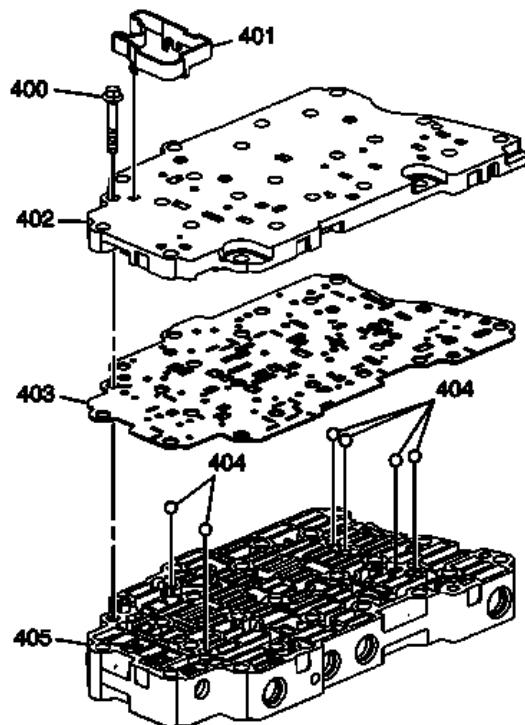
View Of Control Valve Body Assembly (1 Of 2)
